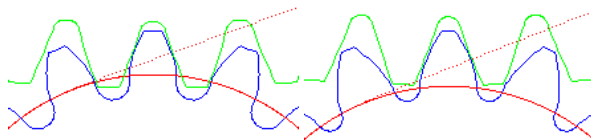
Left: non optimized gear. Right: optimized gear of comparable cost.
